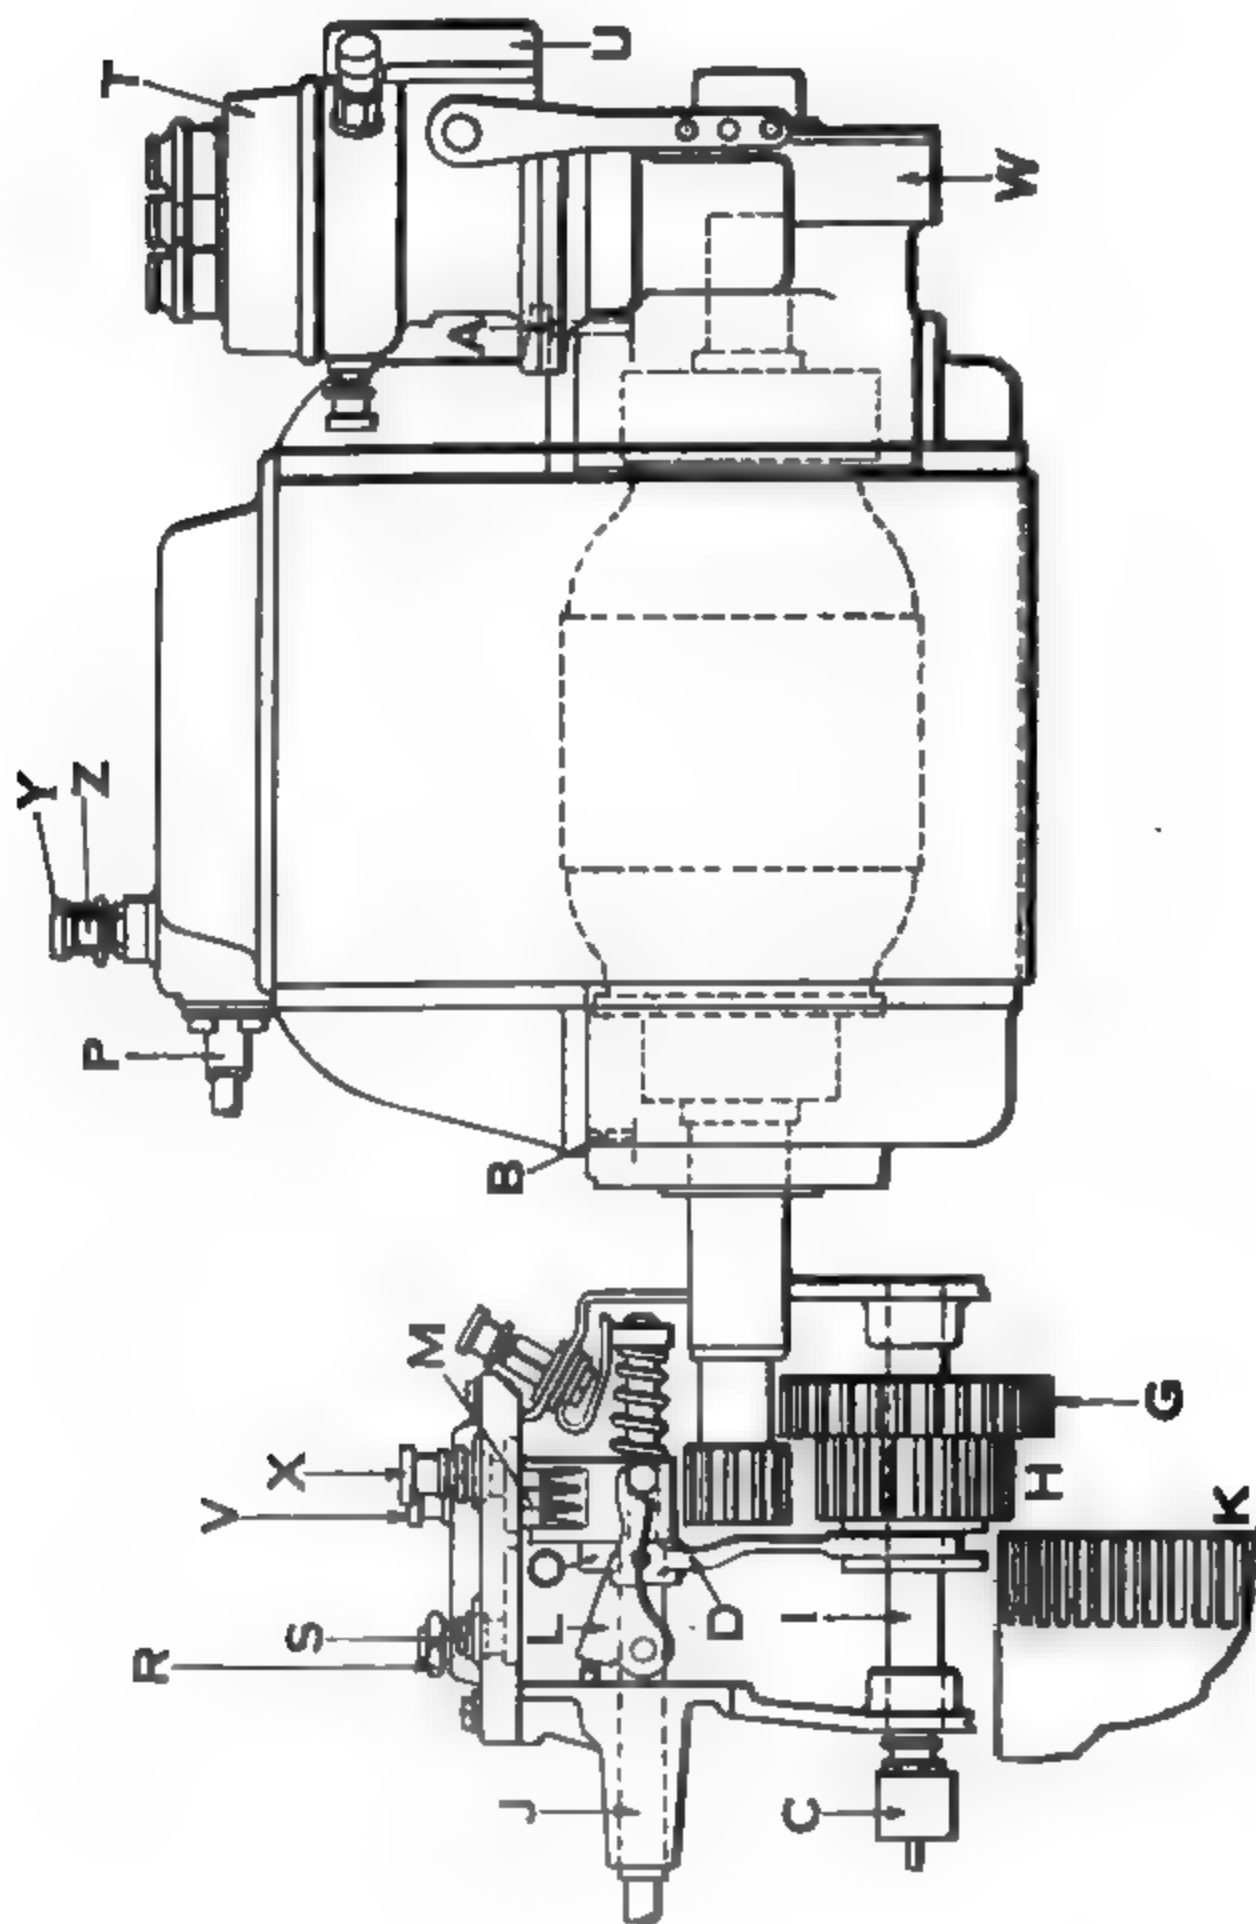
C — Delco starter and generator combined showing plan of shifting gears.
